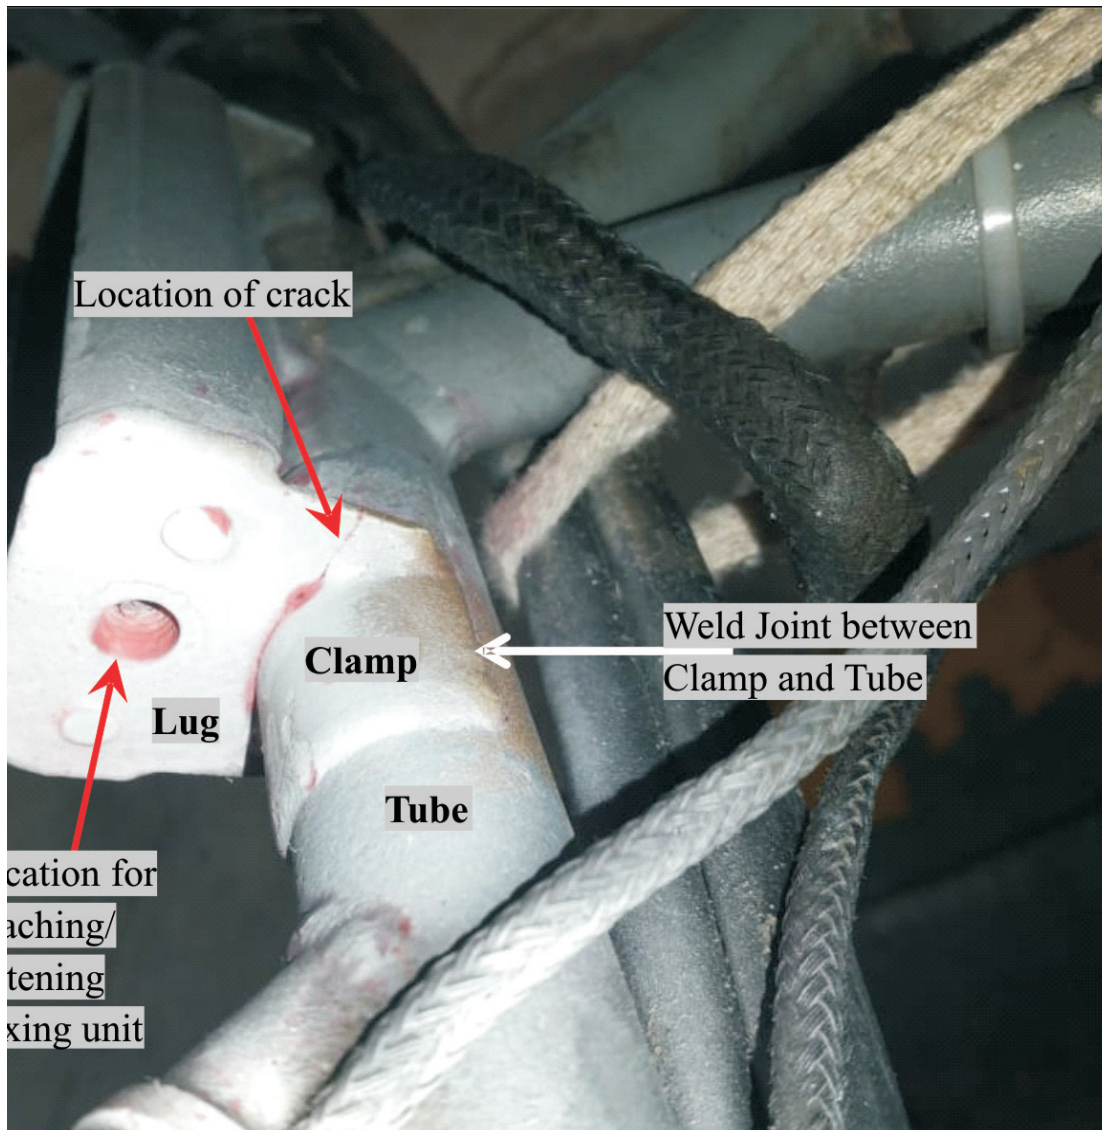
Cracked lug-assembly showing 'lug' & 'clamp' (welded to a tube).
